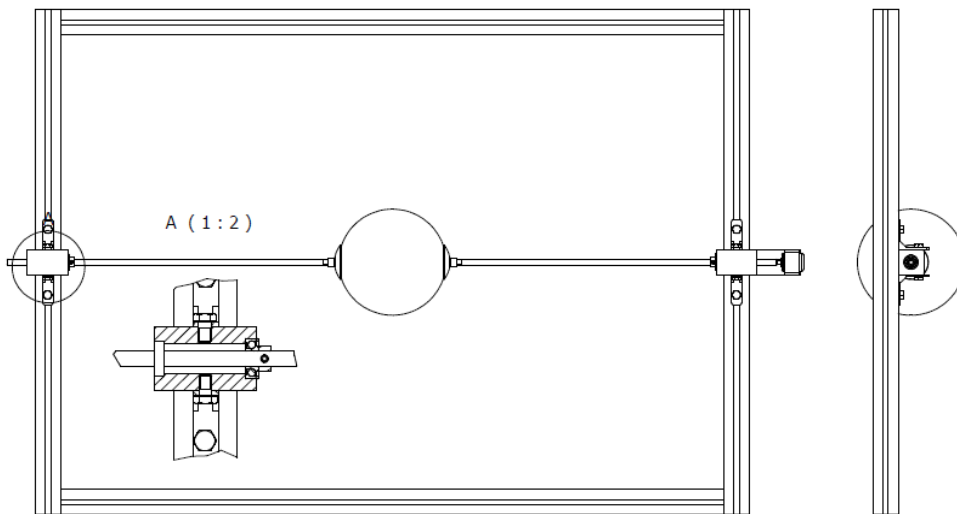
Construction draft of the inner frame, which holds the volleyball and the stepping motor
